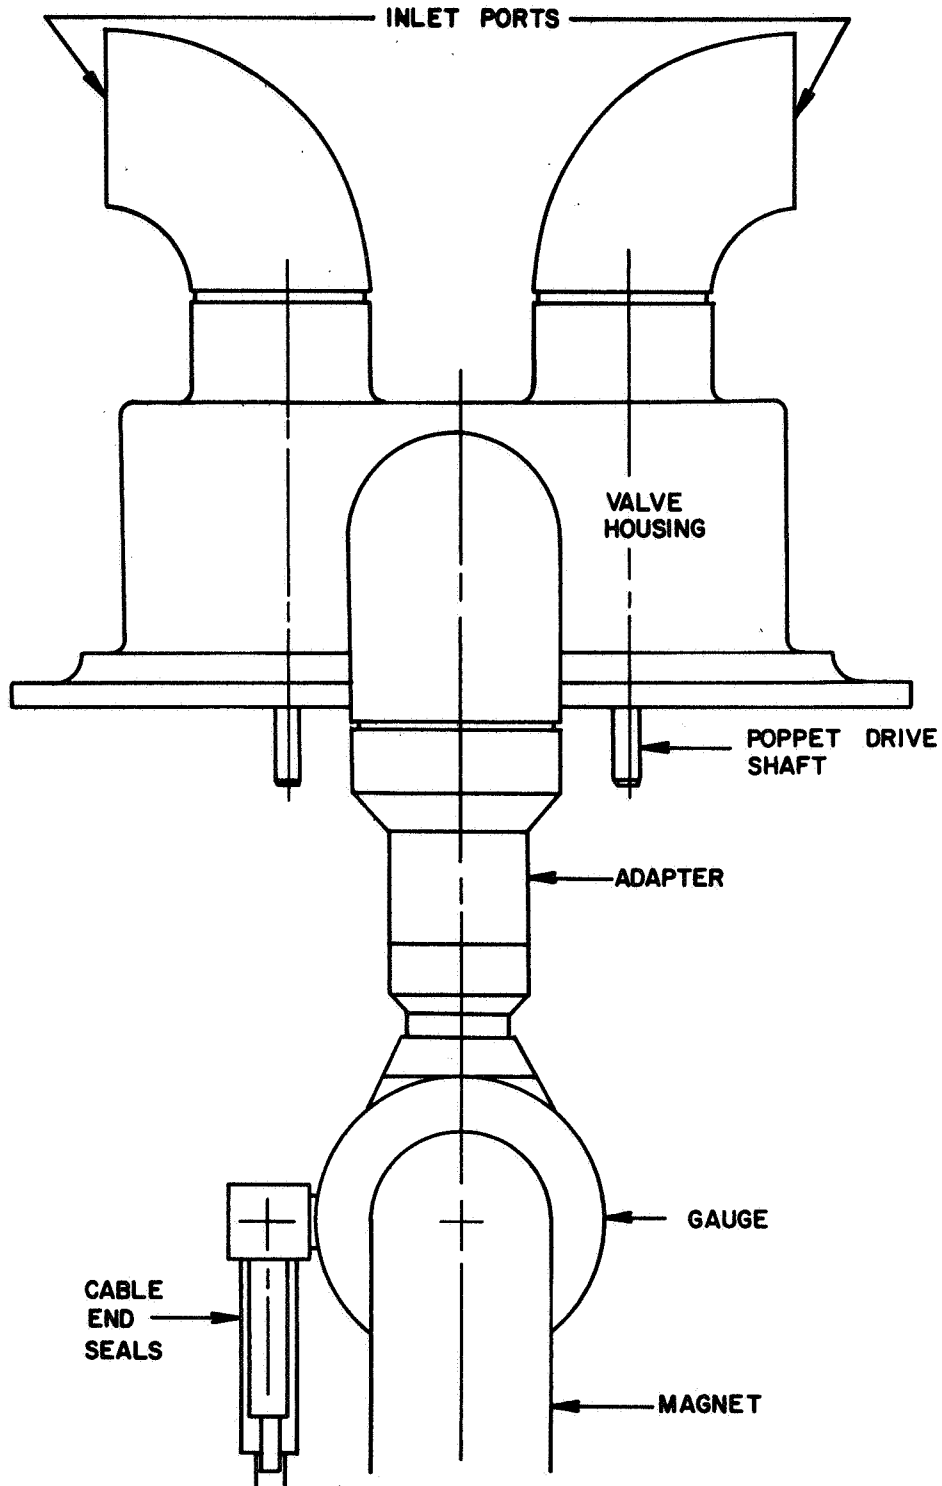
Linear reciprocating valve, gauge and magnet assembly.
